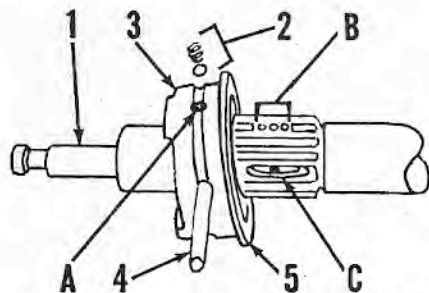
Assembling the shift mechanism to propeller shaft. Refer to text.
